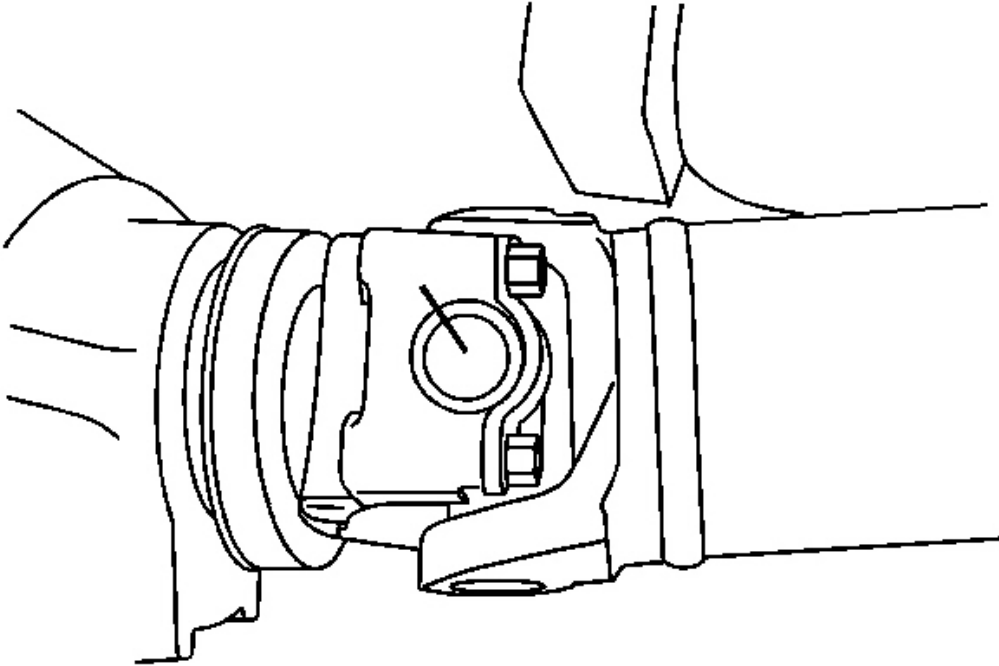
View Of Marked Rear Universal Joint To Drive Shaft Flange
